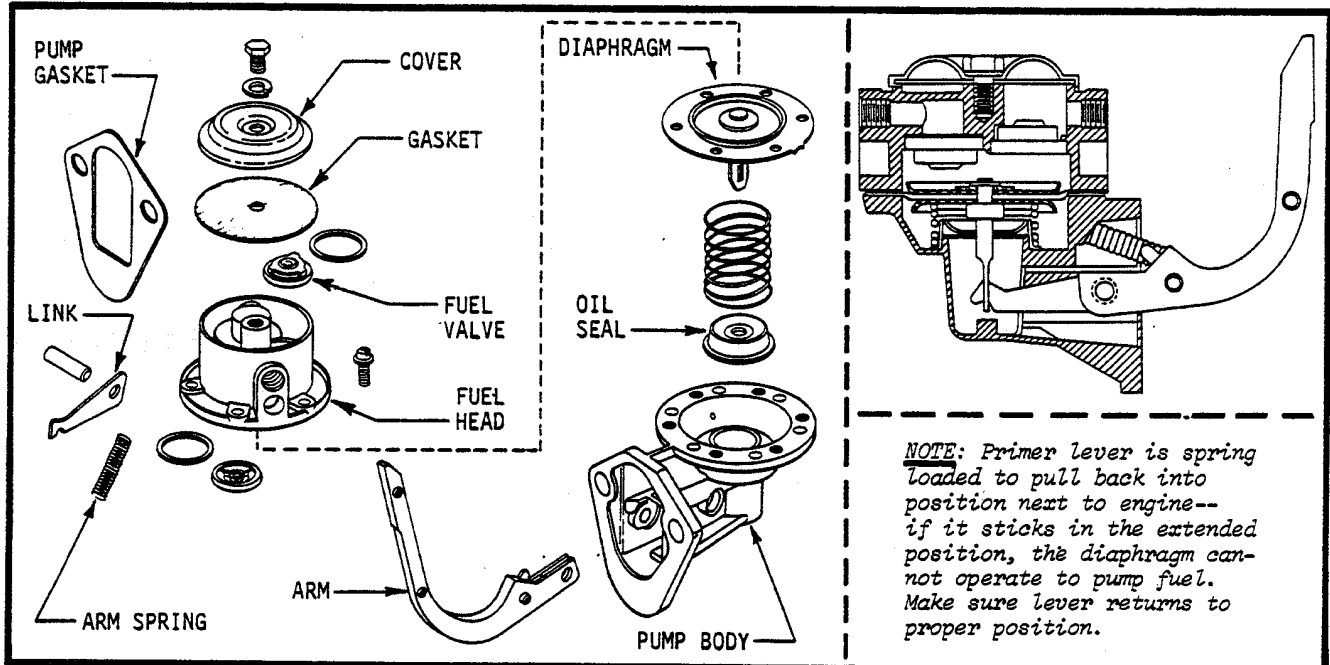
FUEL PUMP EXPLODED AND CUTAWAY VIEWS
